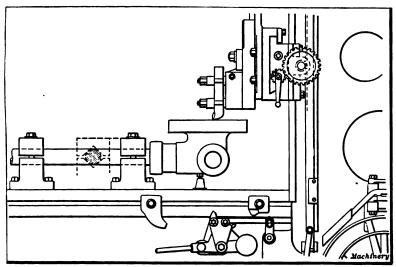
Piston-rod and Attached Cross-head Mounted in V-blocks for Planing shaft down against the platen as well as against the strip itself. This angular face is aligned with the platen by the tongue piece t.
